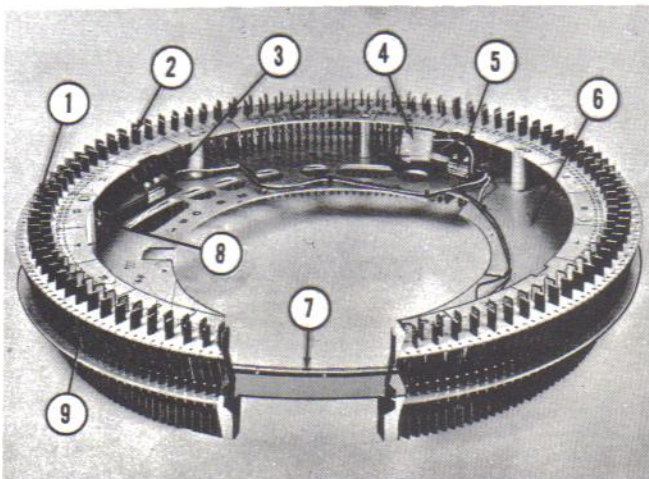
SELECTOR PLATE AND LATCH PIN ASSEMBLY - 2500
